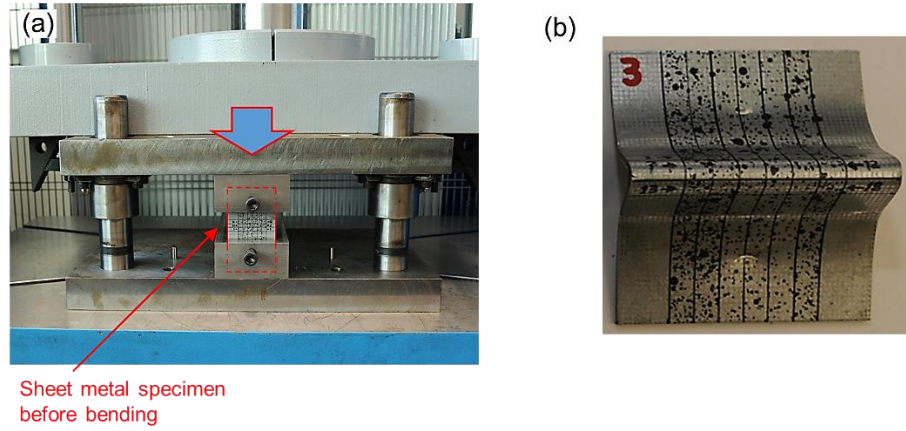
(a) Strip bending fixture with the specimen installed before the deformation, and (b) bent specimen with a crack on the outer radius.
